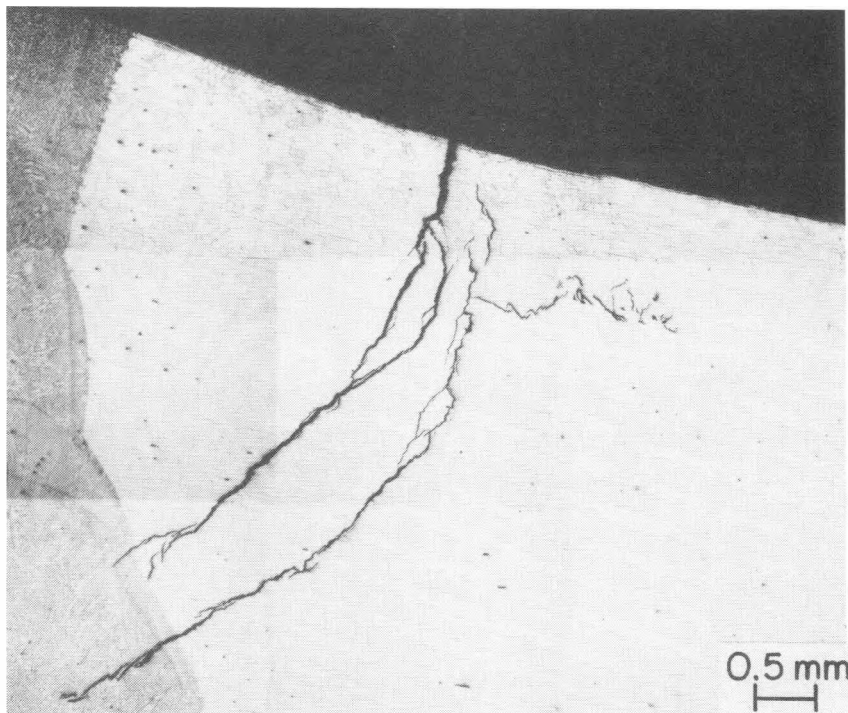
Transgranular Cracks near an Untreated Weld.
